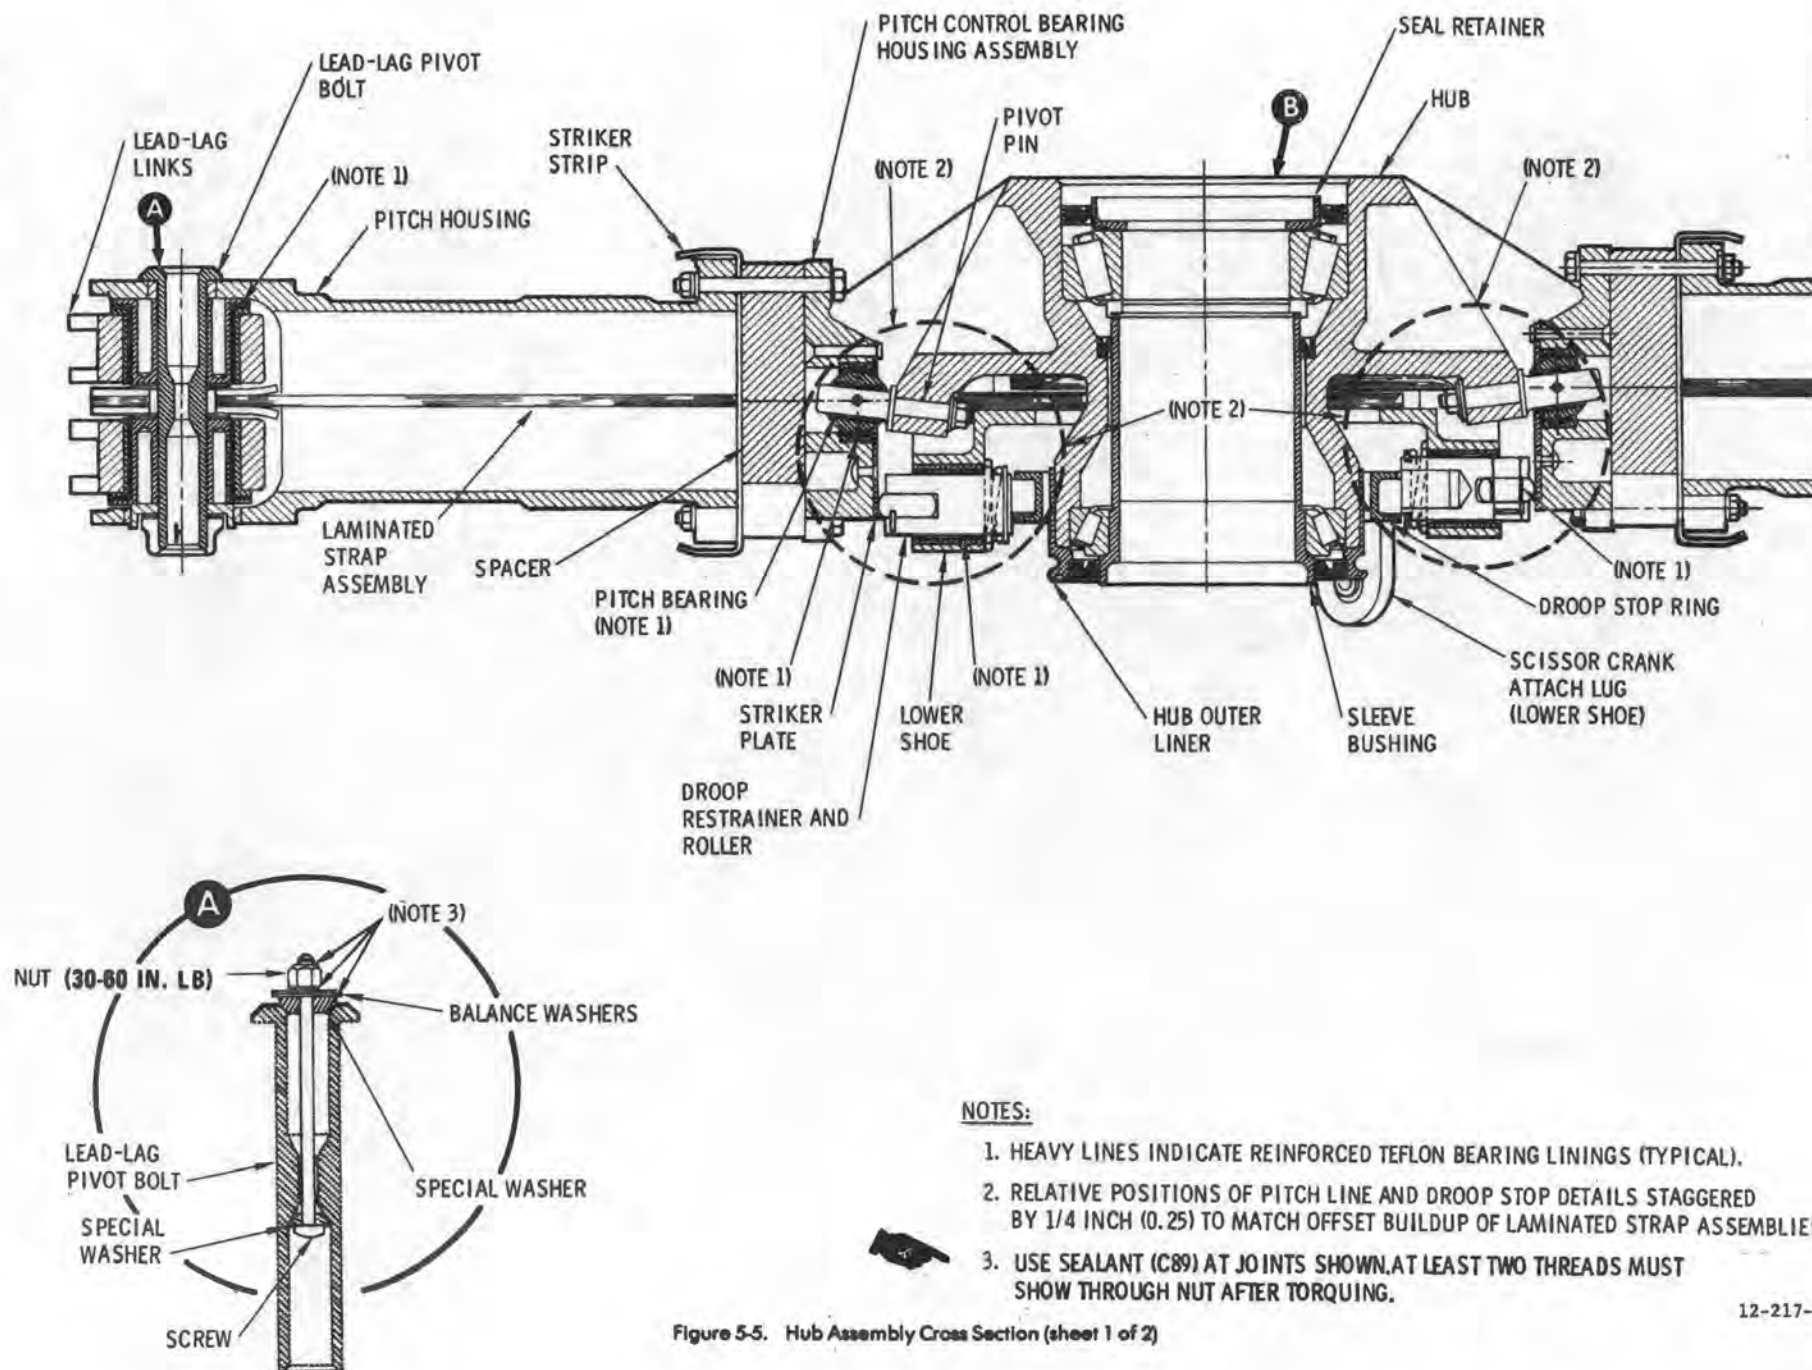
Hub Assembly Cross Section (sheet 1 of 2)
